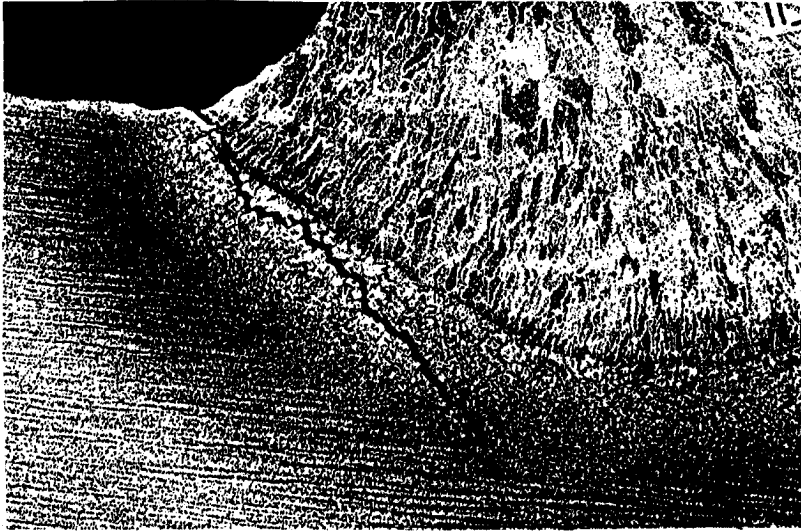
Hydrogen-induced crack at the toe of a multipass fillet weld in the HAZ in C-Mn steel (x20) [2.37].
